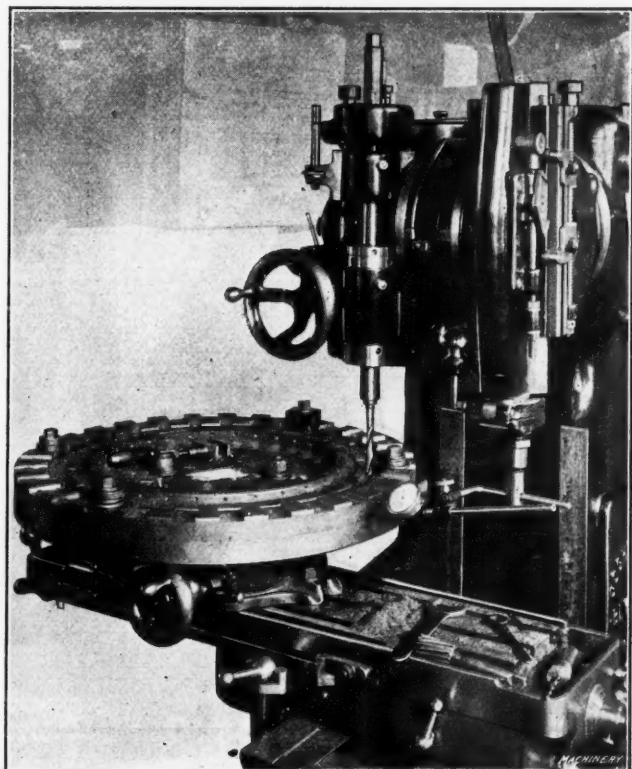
Drilling Holes in Recessed Radial Sections of the Fixture
